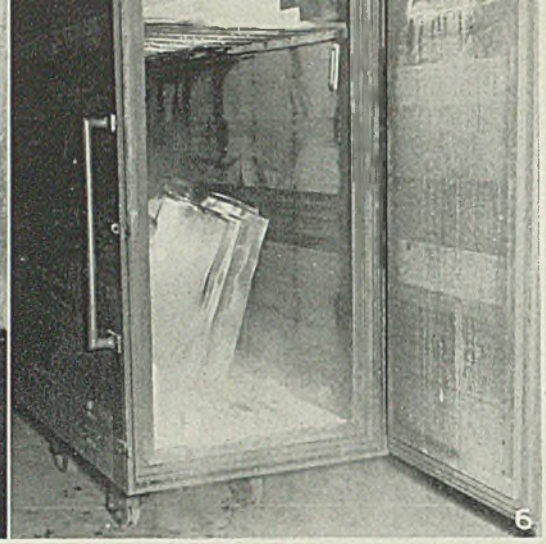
One of the dry-ice boxes in which aluminum alloy sheet stock is kept cold to prevent age hardening while being transferred to forming presses so sheet can be formed while still near zero Fahr.
